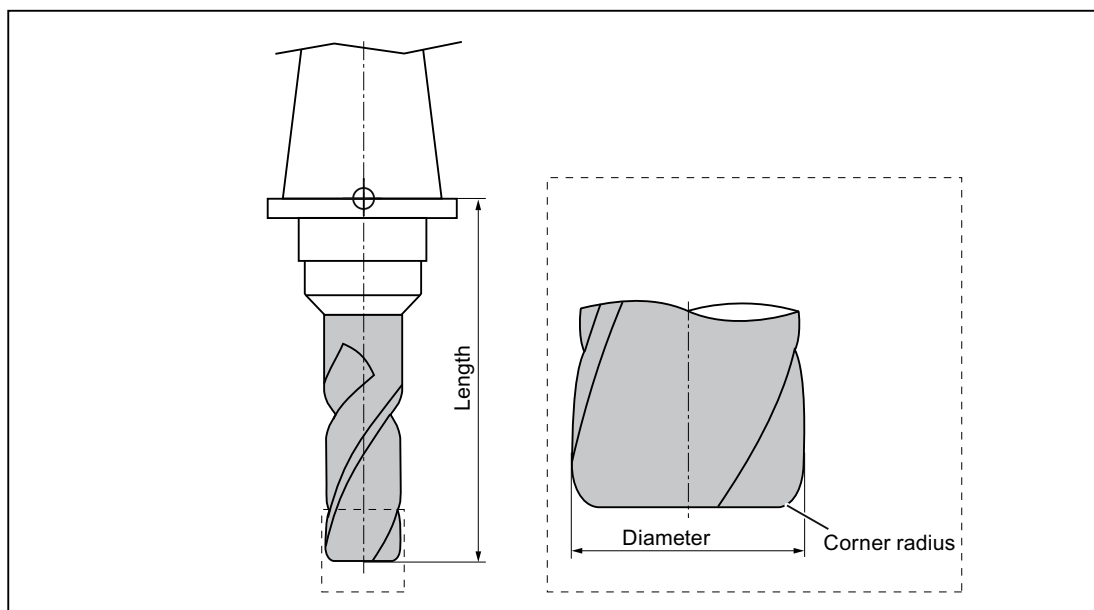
3D tool with an example of an end mill with corner rounding (Type 121)
